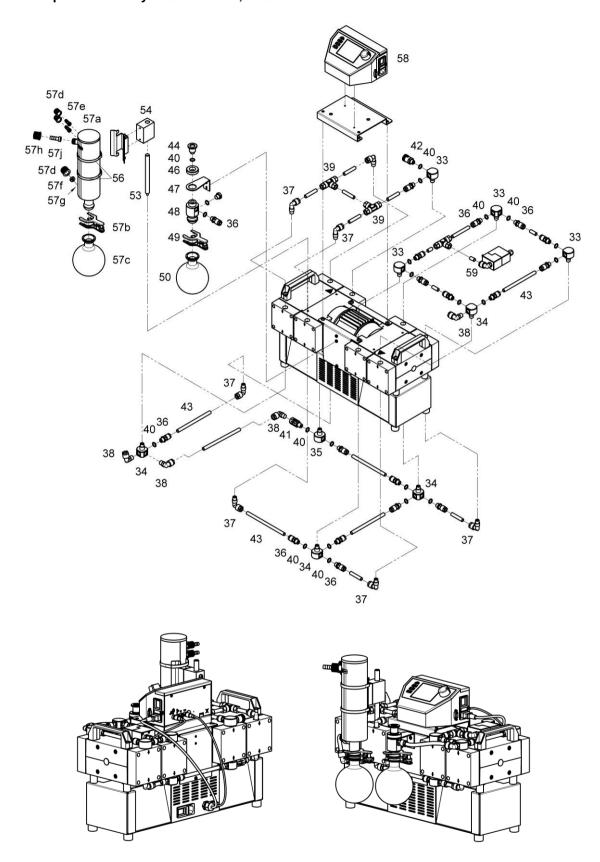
Exploded view and complete assembly (LVS 1210 T ef)
